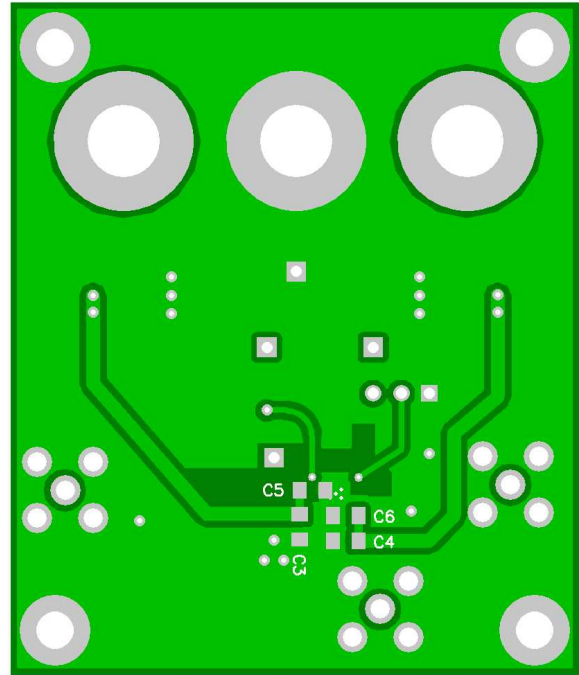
THS3120 EVM Board Layout (Bottom Layer)
